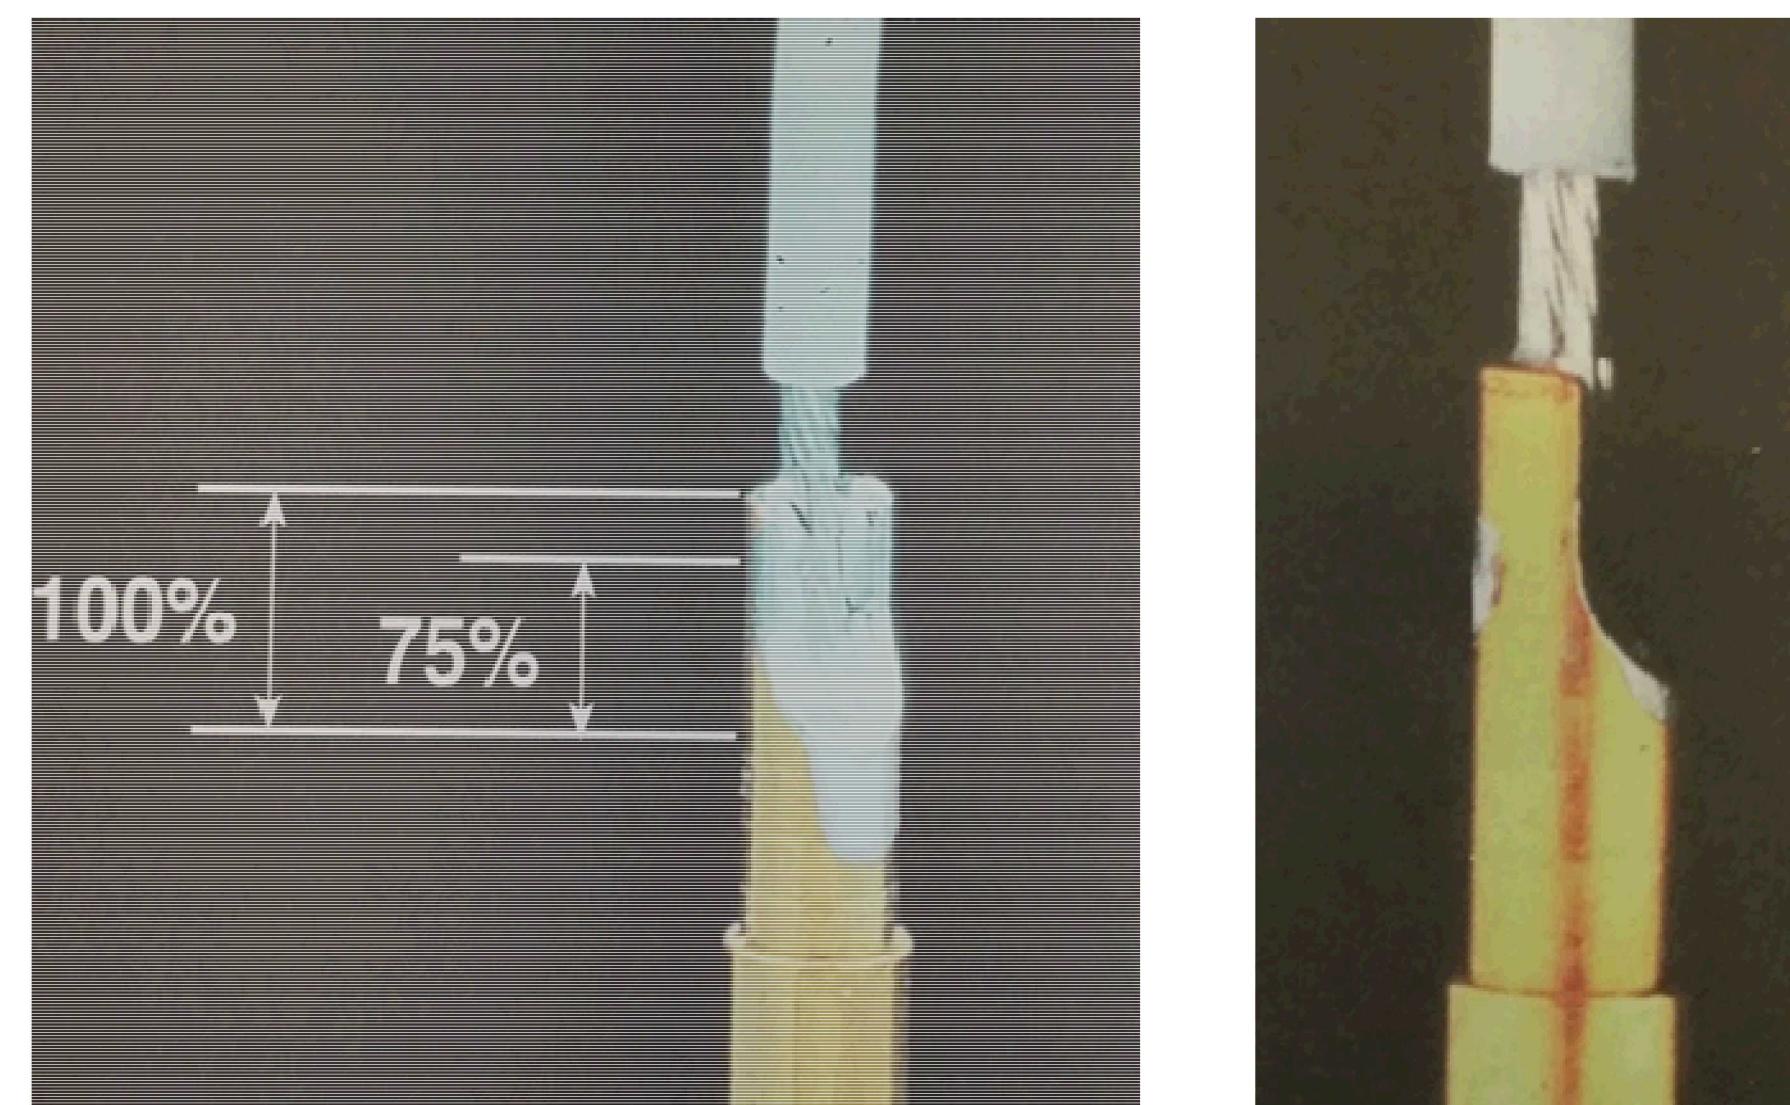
Acceptable solder joint per IPC-A-610 Rev G. The 75% VISIBLE solder fill requirement is highlighted in the left image.
